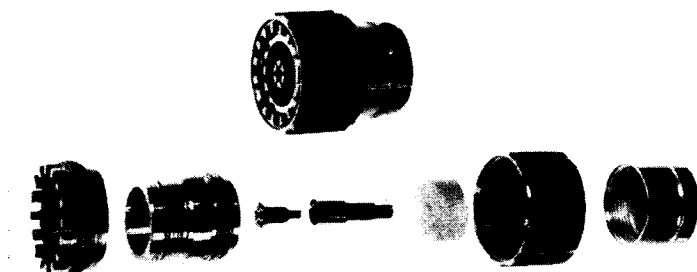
Assembly and exploded view of 14 mm General Precision Connector, General Radio # 900-BT.
